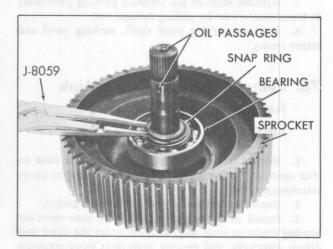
Removing Sprocket Bearing Snap Ring
